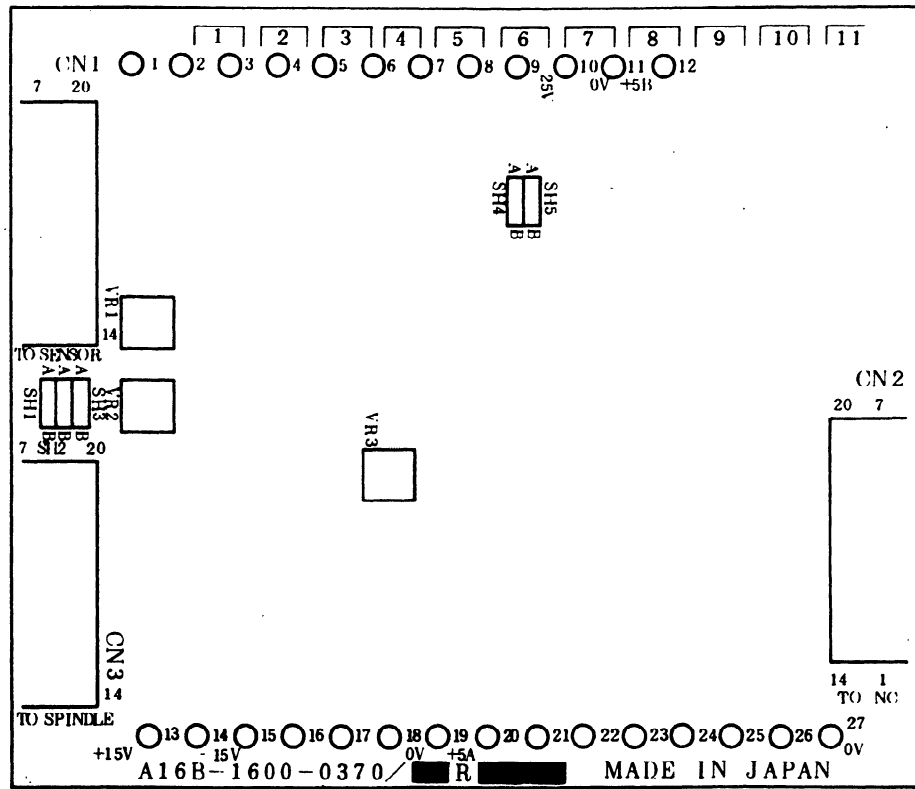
(b) Mounting positions for jumper, variable resistors and test points
